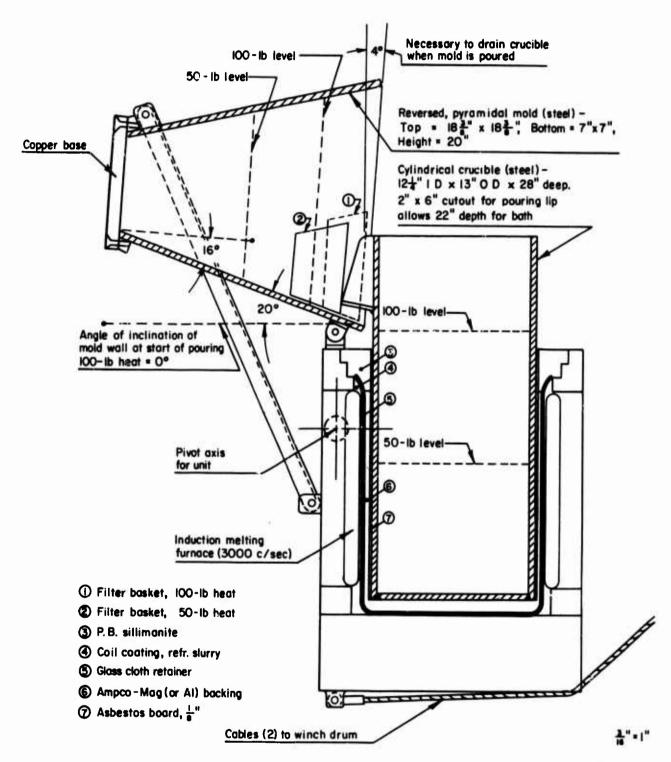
SECTIONED VIEW OF VACUUM-INDUCTION MELTING UNIT SHOWING MOLD AND CRUCIBLE ARRANGEMENT FOR CASTING 50- to 100-POUND HEATS OF MAGNESIUM-LITHIUM ALLOYS
